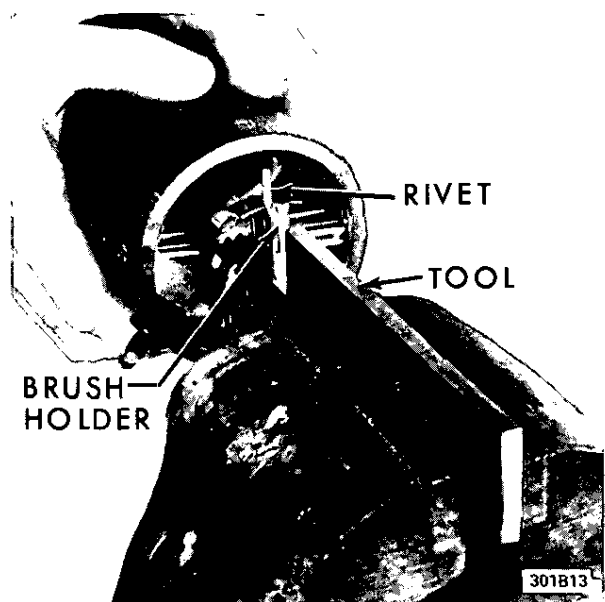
B-13 Brush Holder and Rivet Installed on Tool
